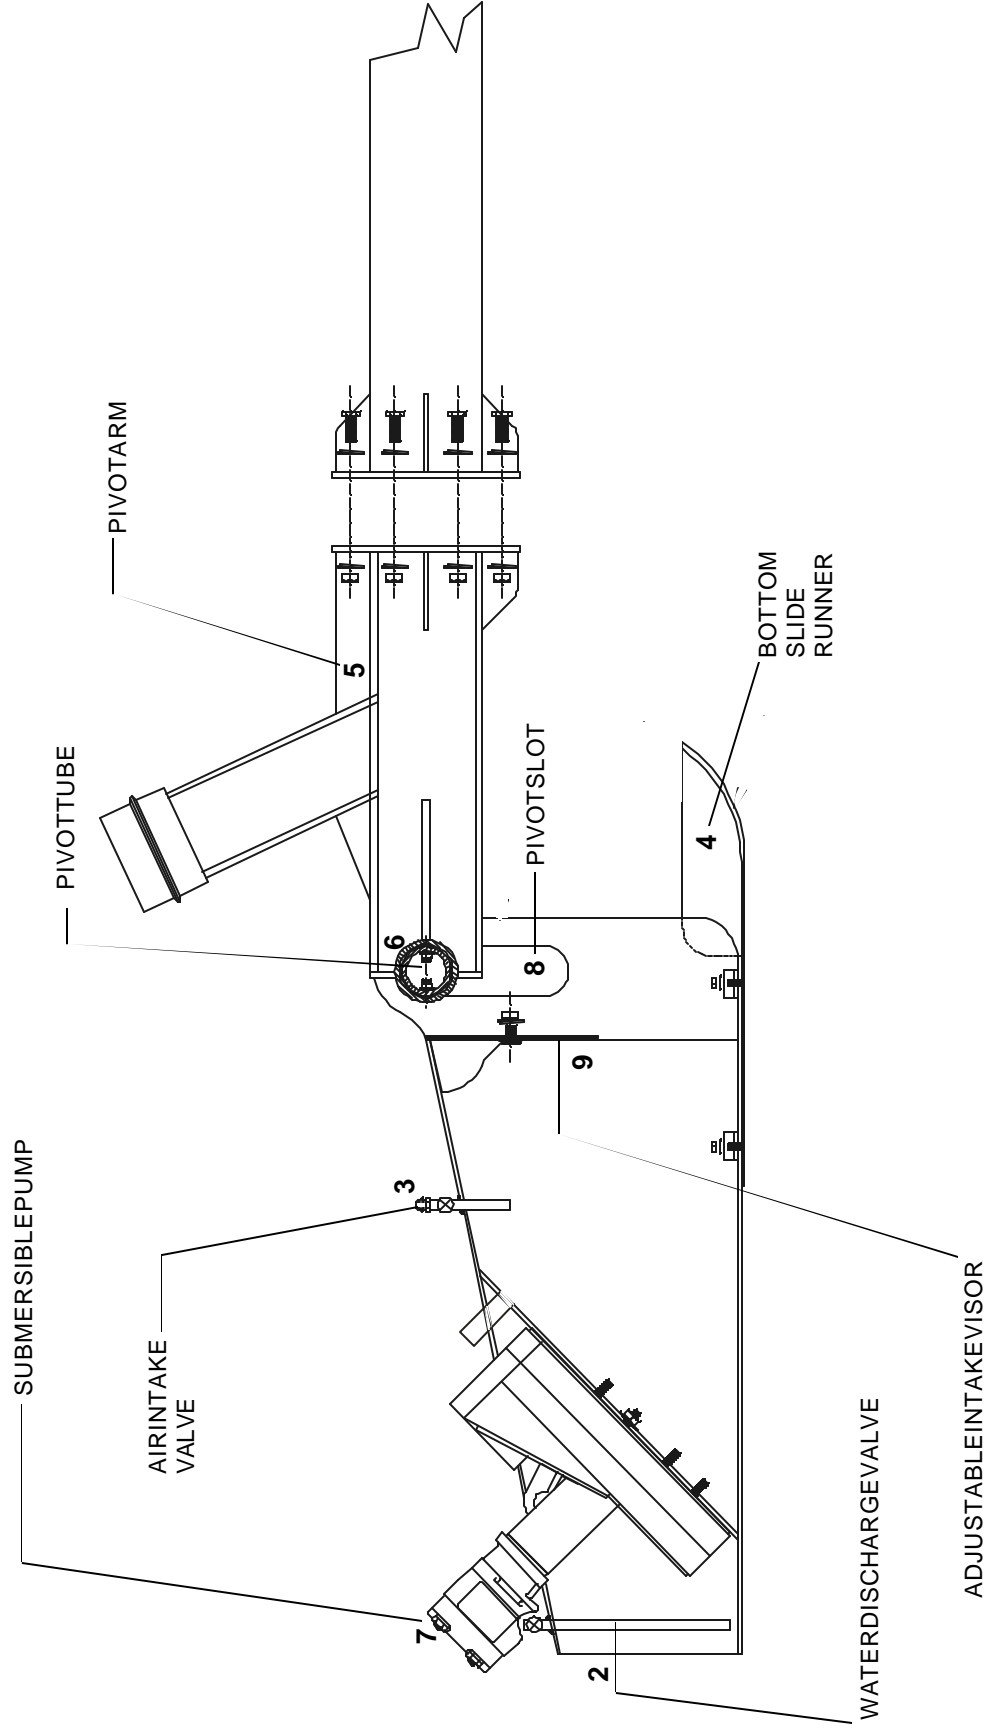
Cross-Sectional View of SED CUT Dredge Head
